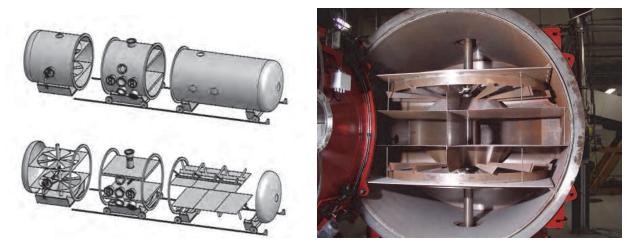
a) Exploded view of the AWTSII planetary environmental wind tunnel, and b) photograph into the fan section.
